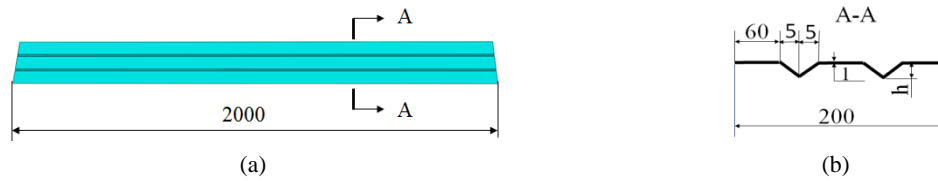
Sheet geometry: (a) corrugated sheet; and (b) cross-section
